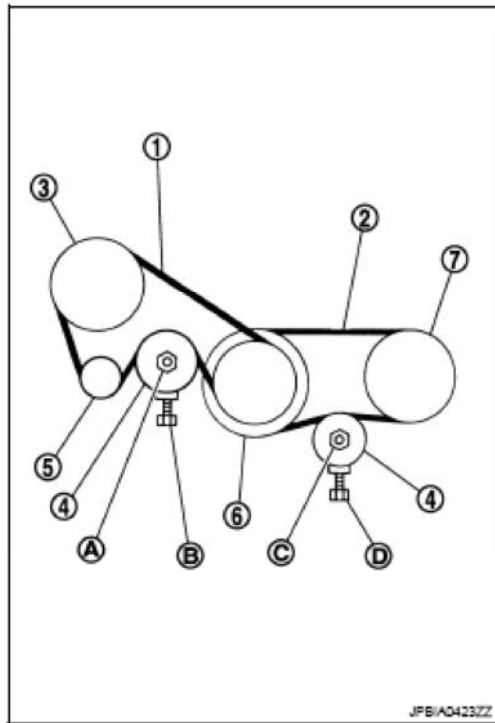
Identifying Alternator And Power Steering Oil Pump Belt Tension
